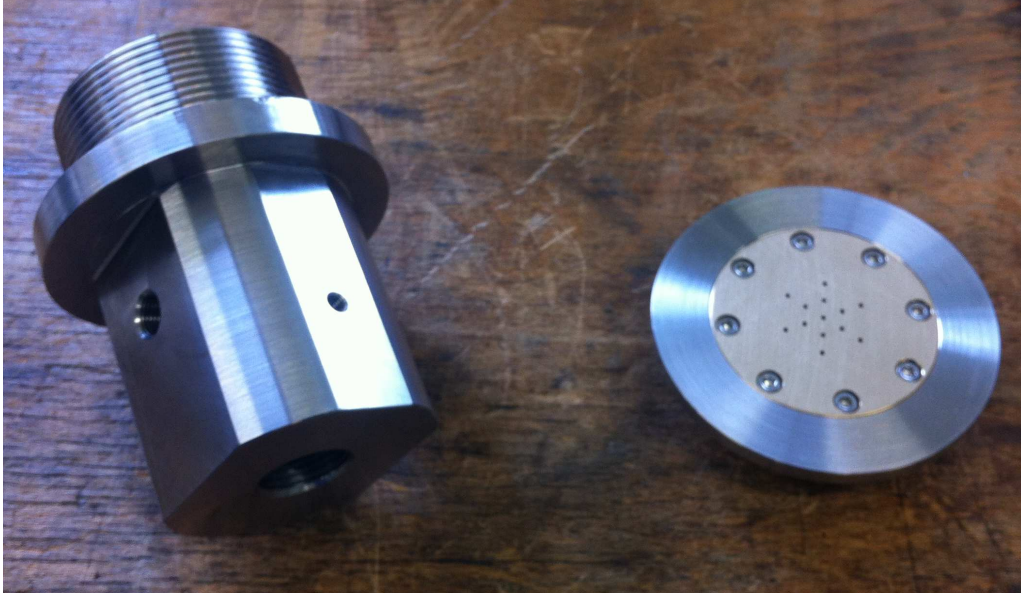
ZEpHyR main engine EM injector assembly with showerhead injector plate
